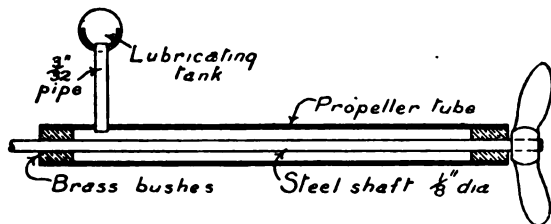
LONGITUDINAL SECTION THROUGH PROPELLER TUBE.
